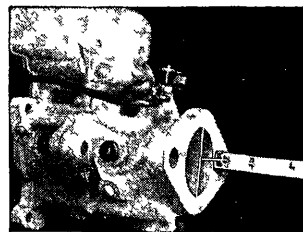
Adjust anti-percolator. Open throttle the specified distance (see Carter Specification table) by placing gauge between valve and bore of carburetor (side opposite idle port)
